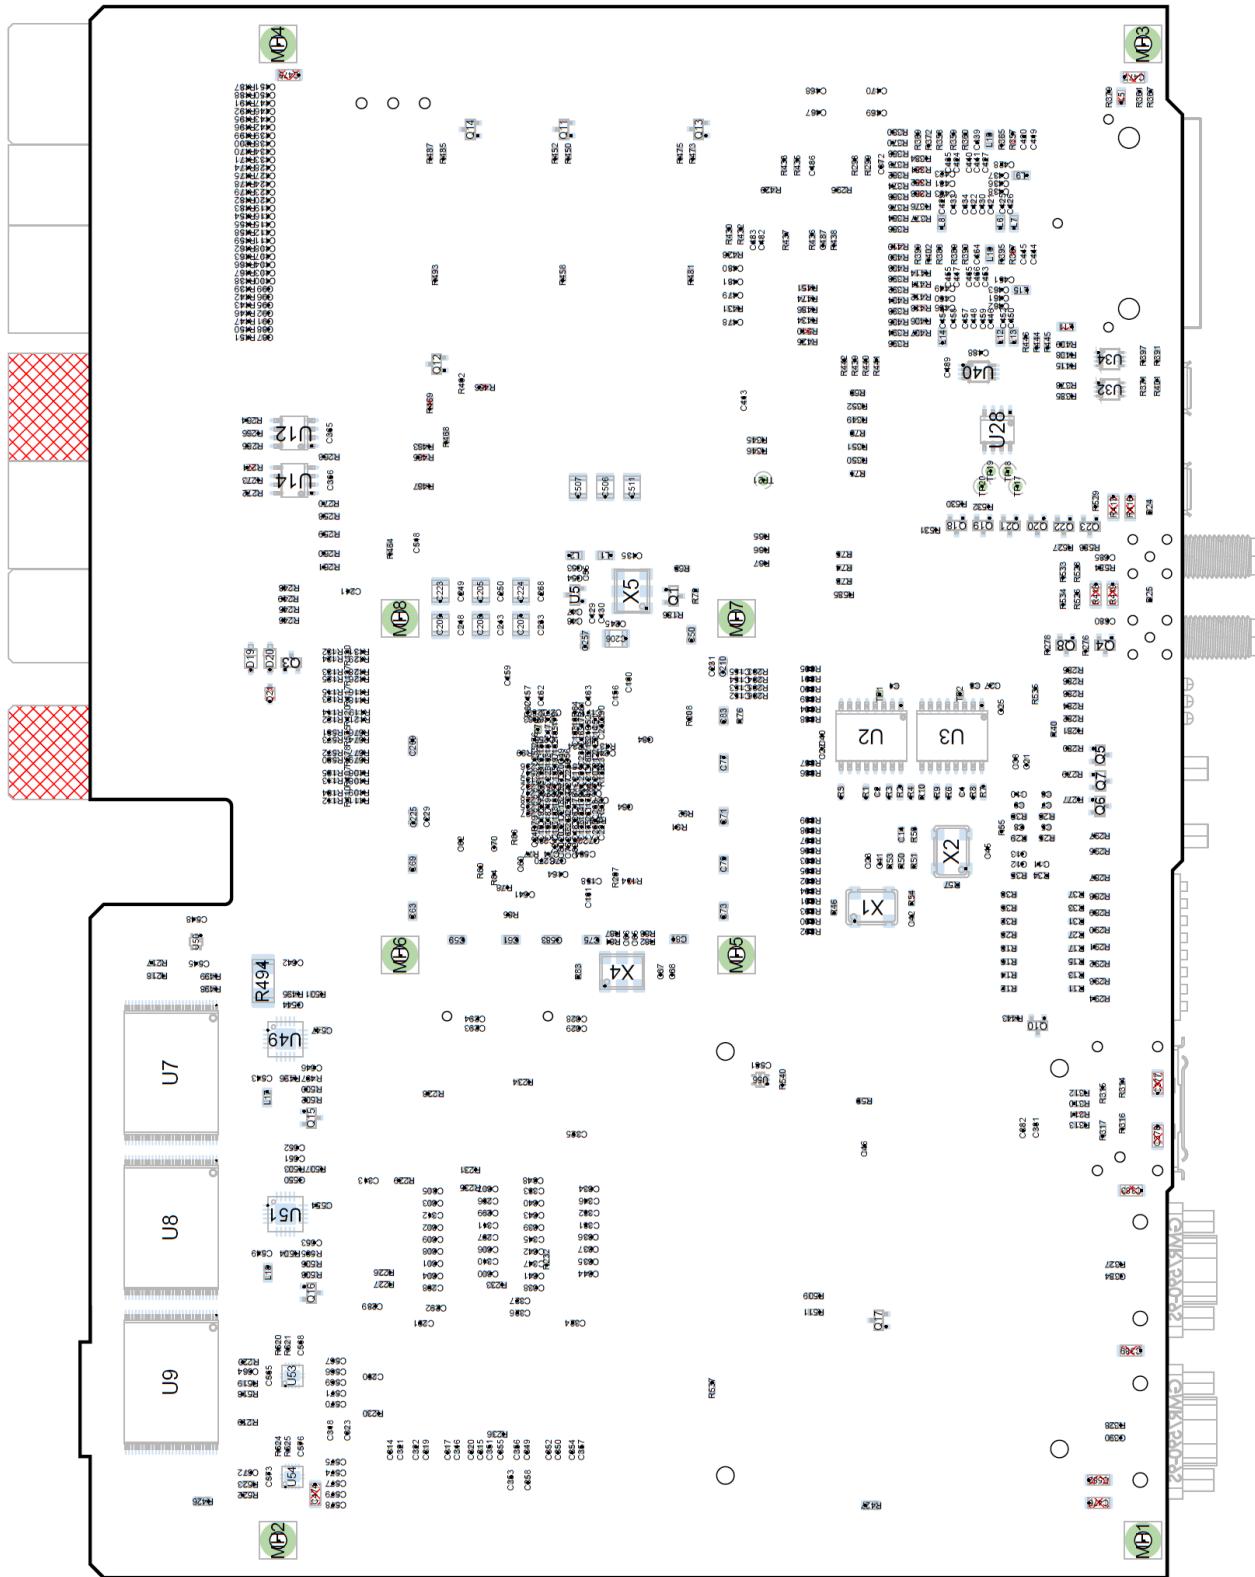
GR-CPCIS-XCKU PCB Bottom View (extract from [RD2])
